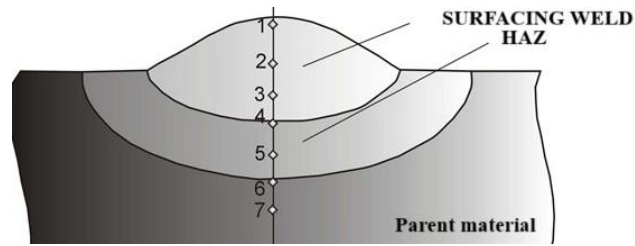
HV1 hardness measurement points of surfacing welds made in S420 MC steel grooves
